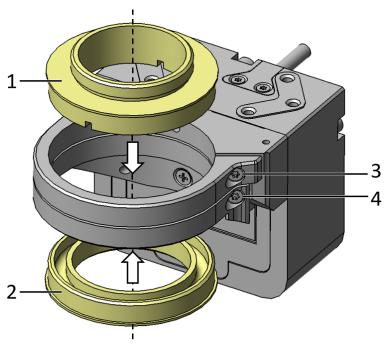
Schematic diagram of parts relevant for mounting the P-725
